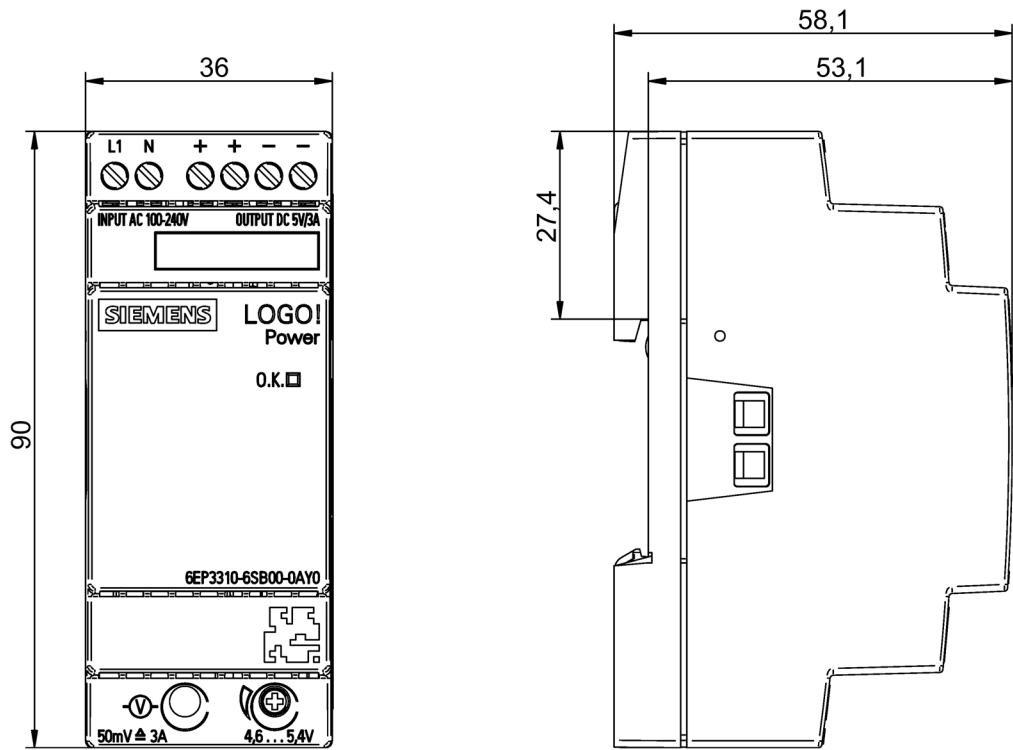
Dimension drawing for 6EP3310-6SB00-0AY0, 6EP3321-6SB00-0AY0, 6EP3321-6SB10-0AY0 and EP3331-6SB00-0AY0
